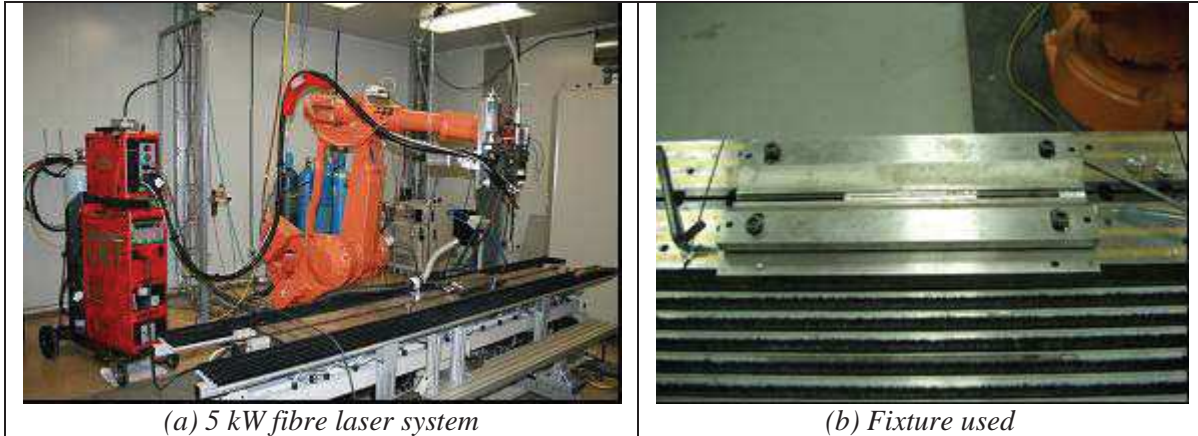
AMTC 5 kW fibre welding system and fixture used in this study
